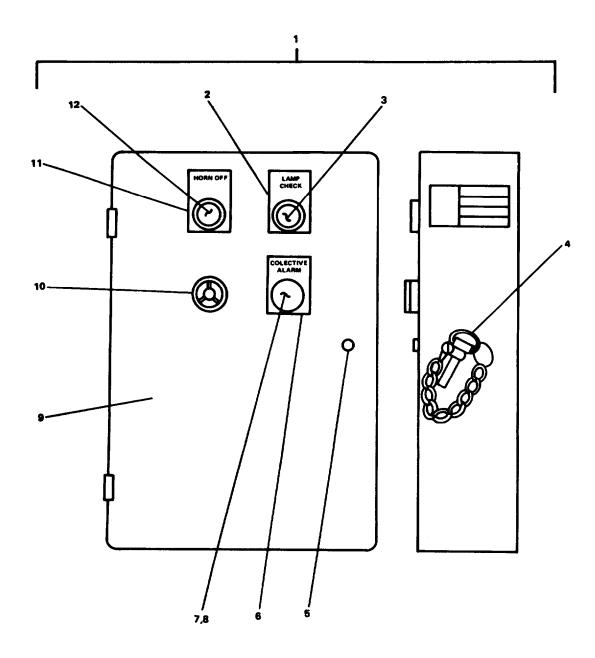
Control Unit Assembly. Bowthruster (Sheet 1 of 2).
